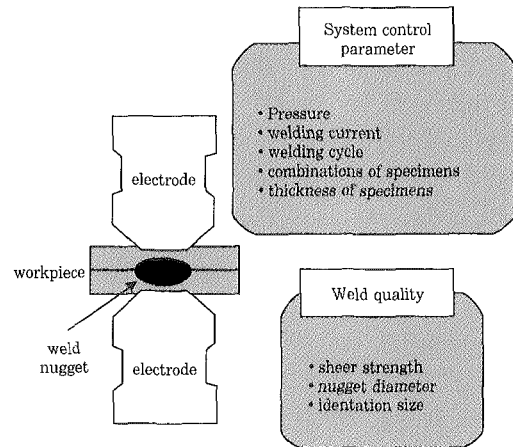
System Parameters in Resistance Spot Welding
